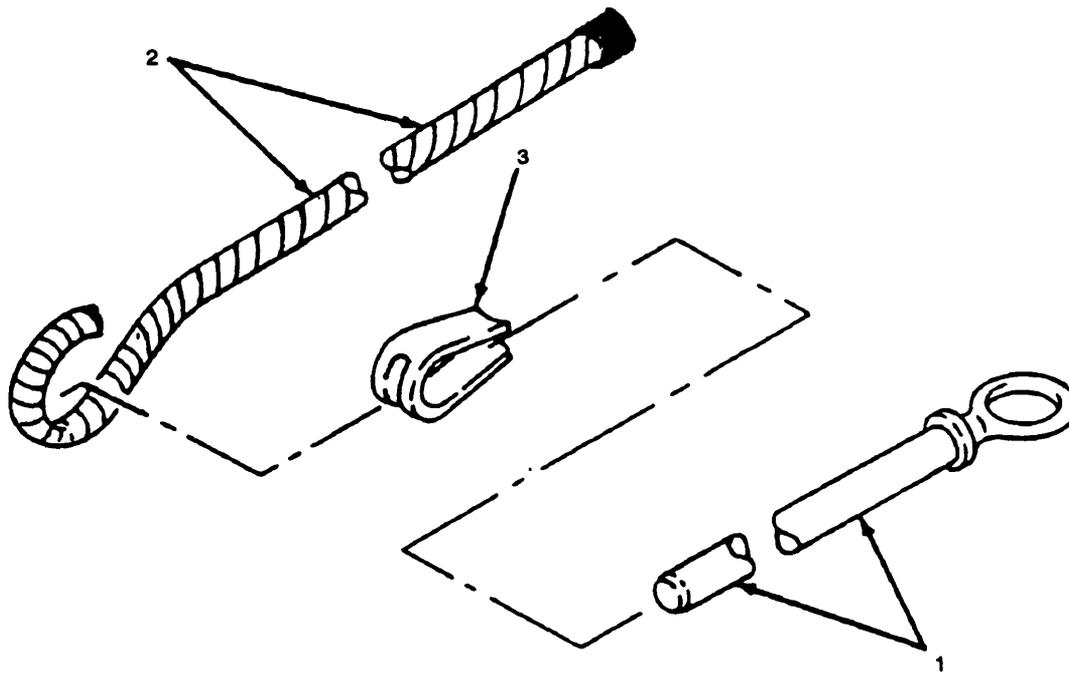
Bay Latch Pin and Rope Assembly, Repair.
